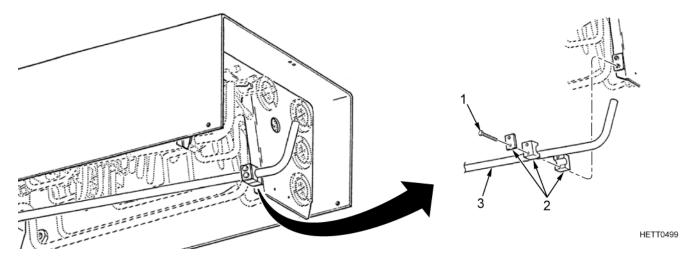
Gooseneck Isolation Valve Assembly Removal.
